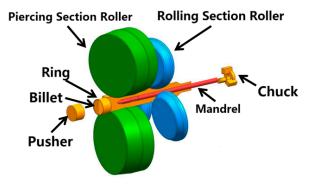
Tandem flexible skew rolling [37] (Reprinted from ref. [37]).
